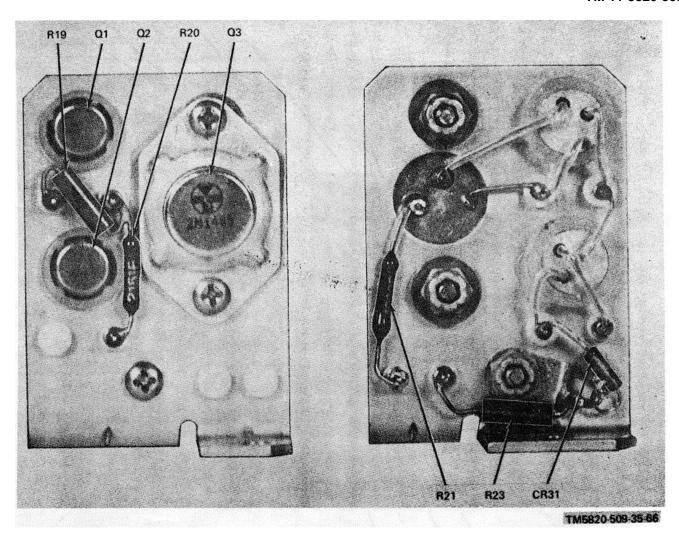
Power Supply PP-3518/PRC-47 (A8A5), Voltage Regulator Assembly TB1.
